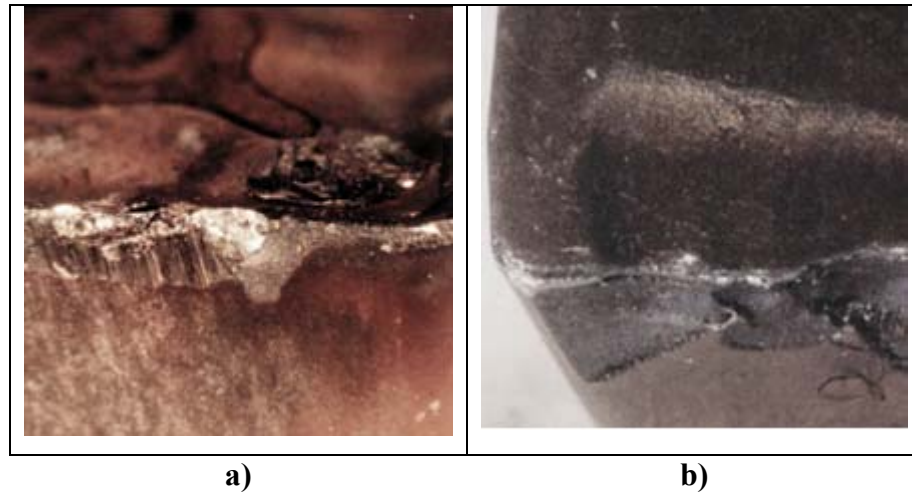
Brittle fracture types. a) Chipping of the cutting edge and b) Fracture.
